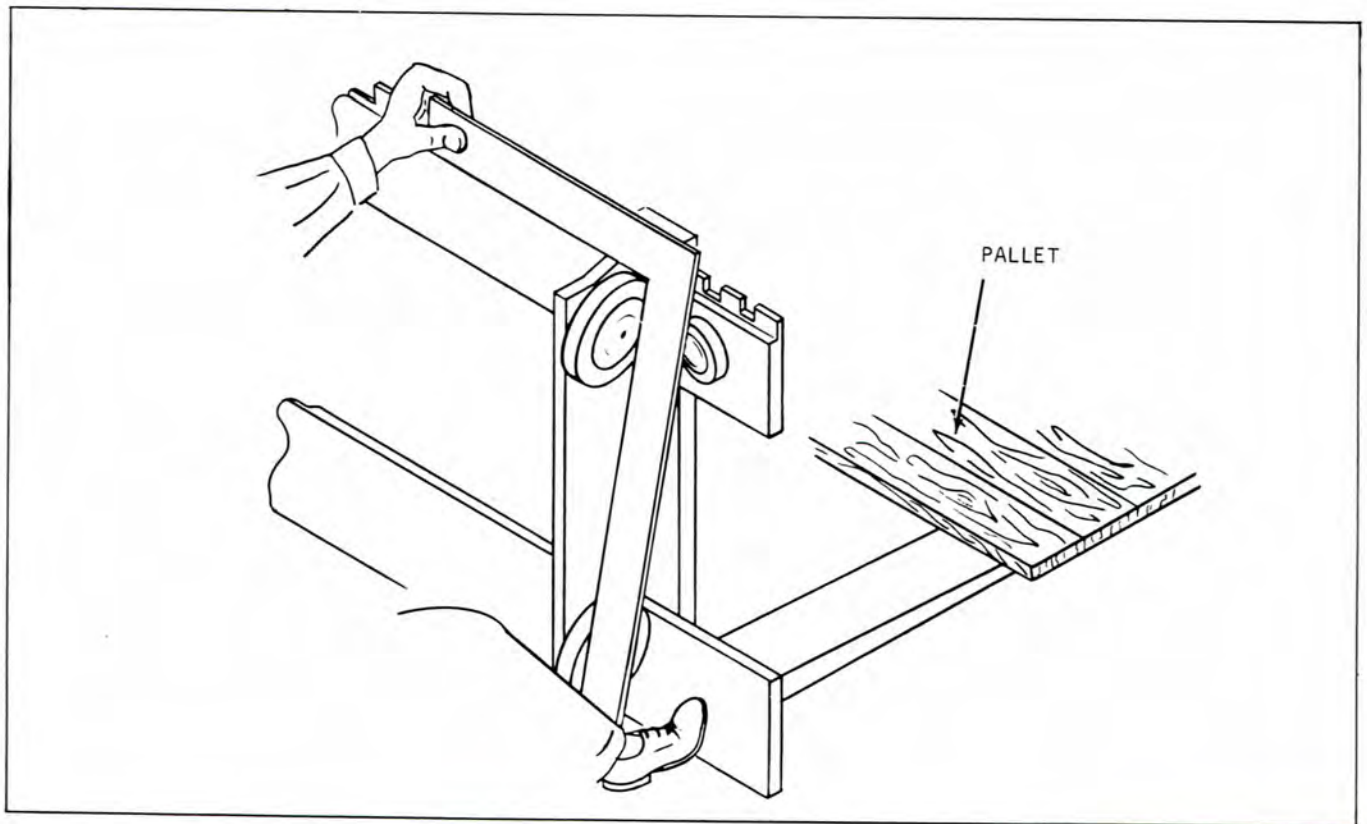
Squaring Carriage Rollers (Four Roller Carriage)
